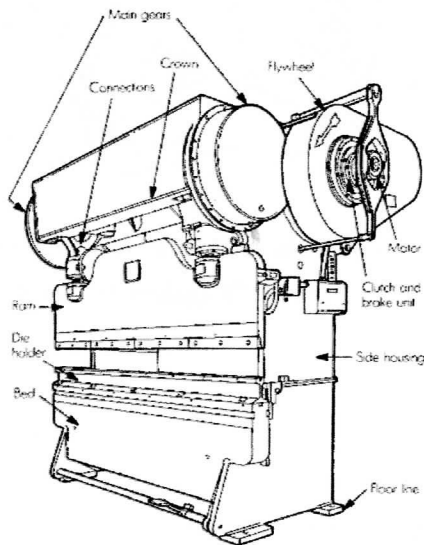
Illustration of press brake bending machine, Wick C. et. al., Tool and Manufacturing Handbook Volume 2 (Forming), 4th Edition
